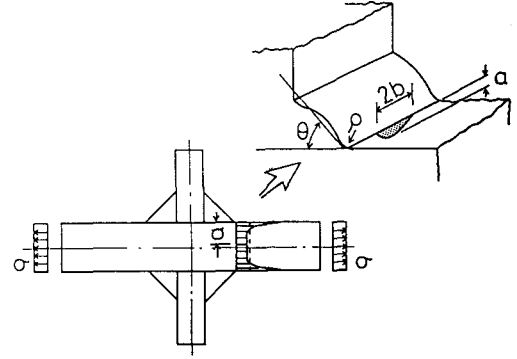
Model of Fatigue Crack Emanating from Weld Toe of the Non-Load Carrying Fillet Welded Specimens
